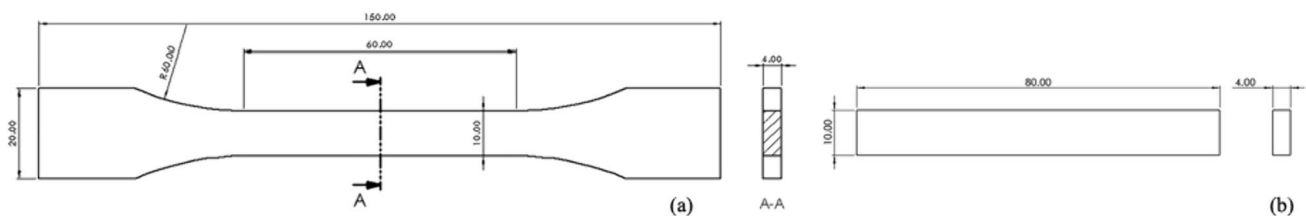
Tensile specimen (a) and flexural specimen (b) (all dimensions in mm)
